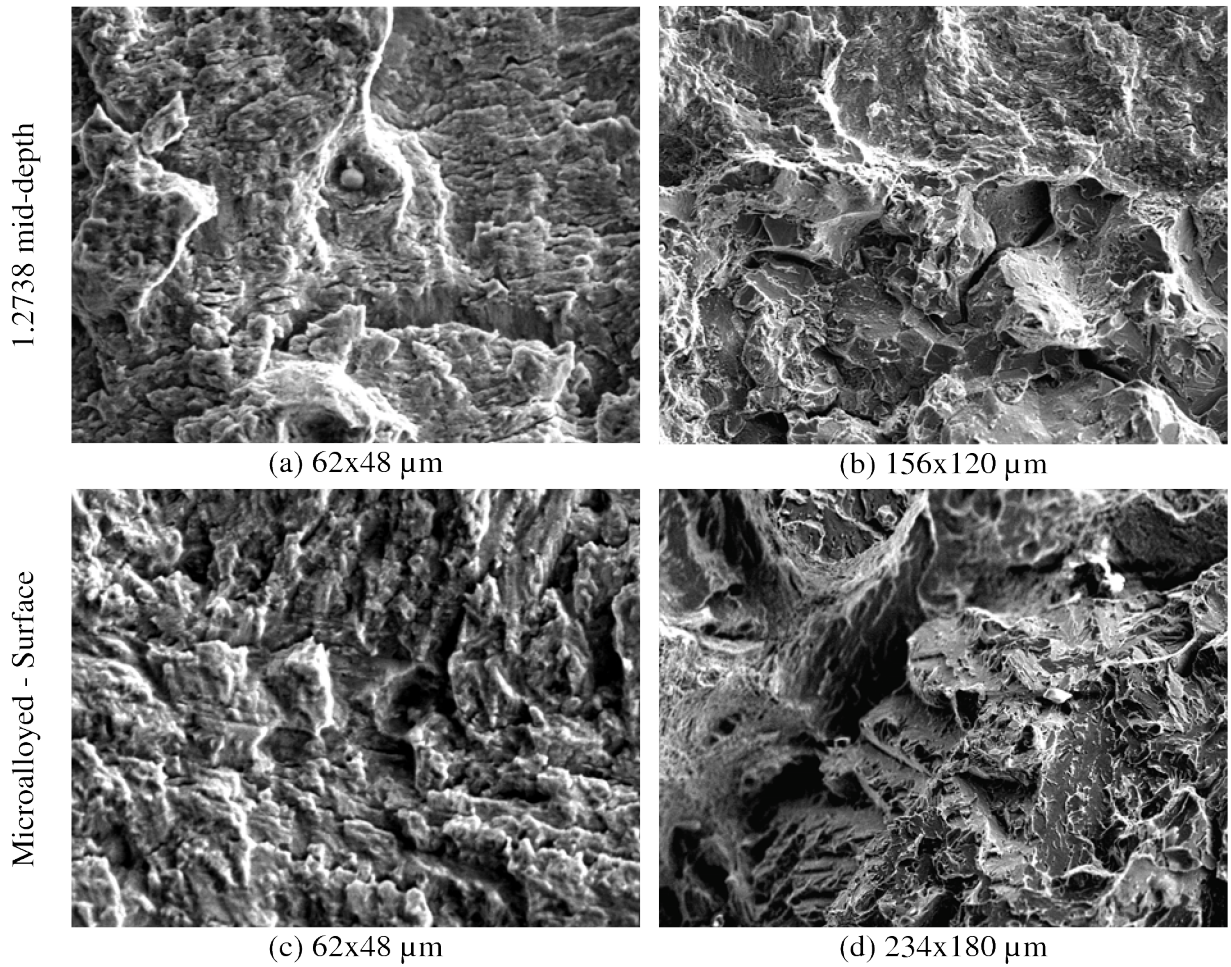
Steel 1.2738, bloom mid-depth position (a, b) and microalloyed steel, surface position (c, d): Fatigue surface at $da/dN \approx 140$ nm/cycle (a), immediately before final fracture (b top, c); final fracture surface (b bottom, d). Crack propagates from top to bottom.
